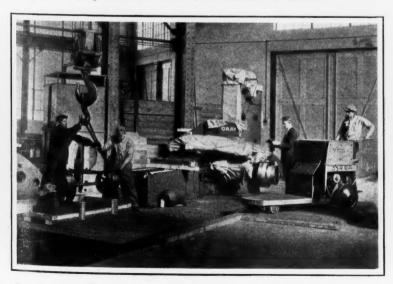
How Planers are Loaded on Railway Cars Ready for Shipment
